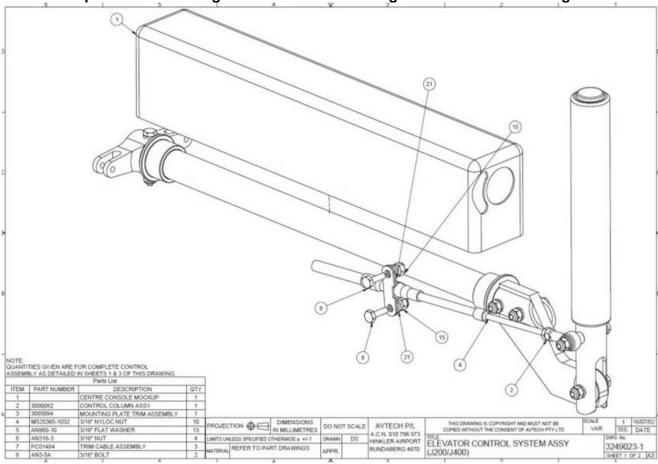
Elevator Control System - Type 1, Sheet 1 (J200/J400, J230/J430, J250/J450)
